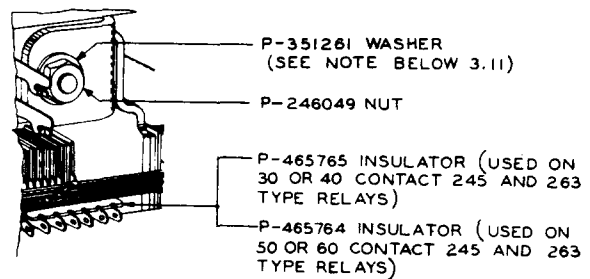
MAGNET CLAMPING NUT AND INSULATOR MOUNTED ON SOLDERING TERMINALS
